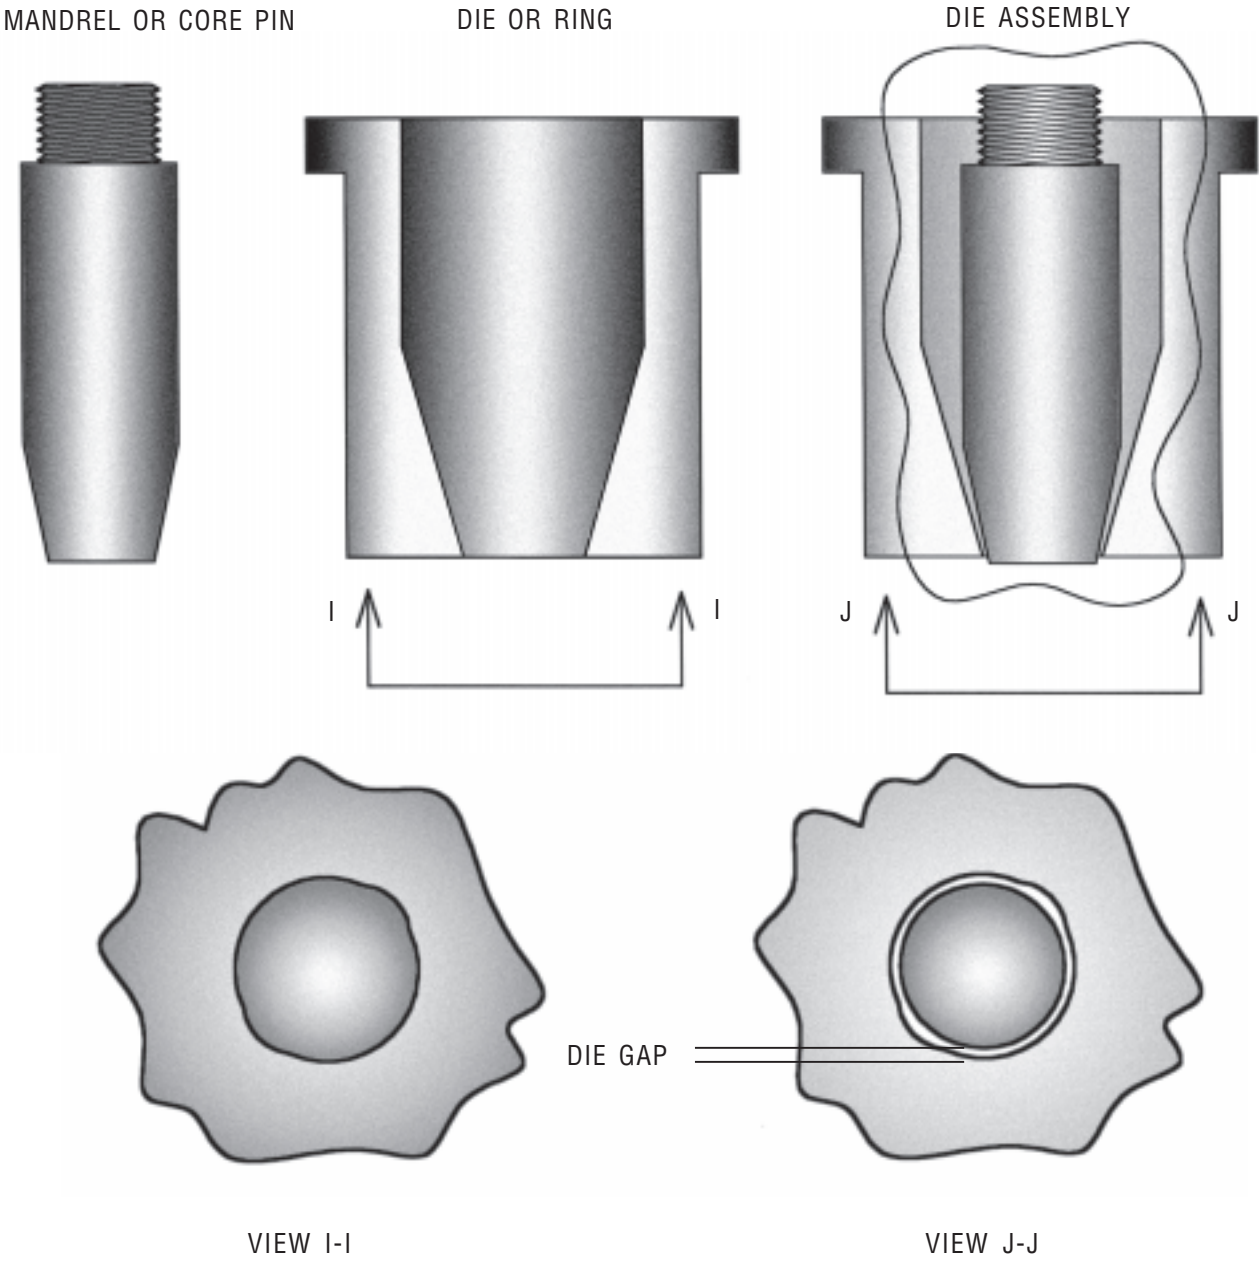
TYPICAL CIRCULAR EXTRUSION TOOLING
